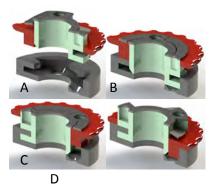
Assembly of Universal Coupler, Concept 2: (A) Unassembled, (B) Inserted but not engaged, (C) Engaged but not locked, (D) Full assembly with latch engaged.
